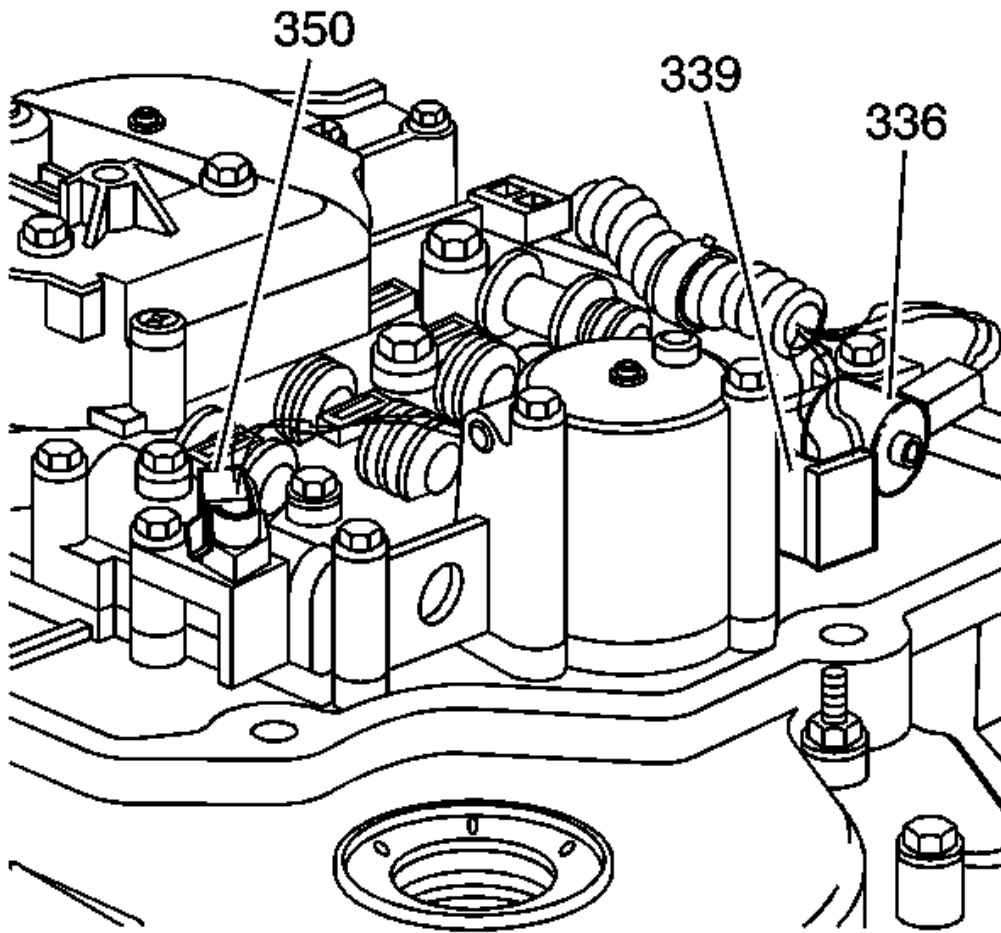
View Of Pressure Control Solenoid Valve, Torque Converter Clutch Solenoid Valve & Transmission Temperature Sensor Electrical Connectors
